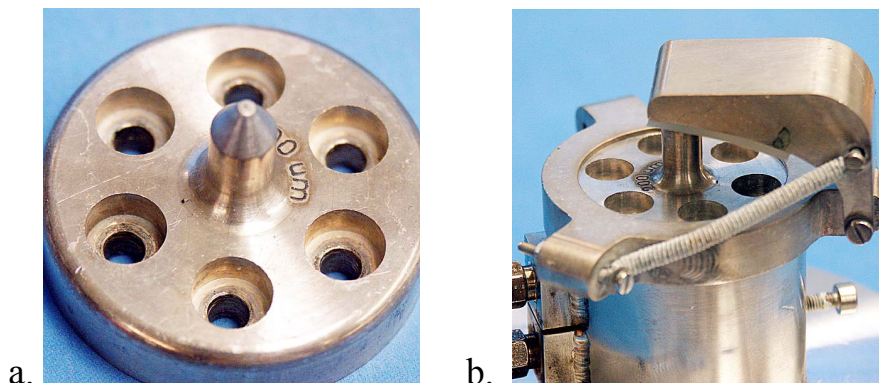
(a) The redesigned nozzle with mounting holes and a 100 μm hole. (b) The nozzle cap in place and closed over the nozzle.
